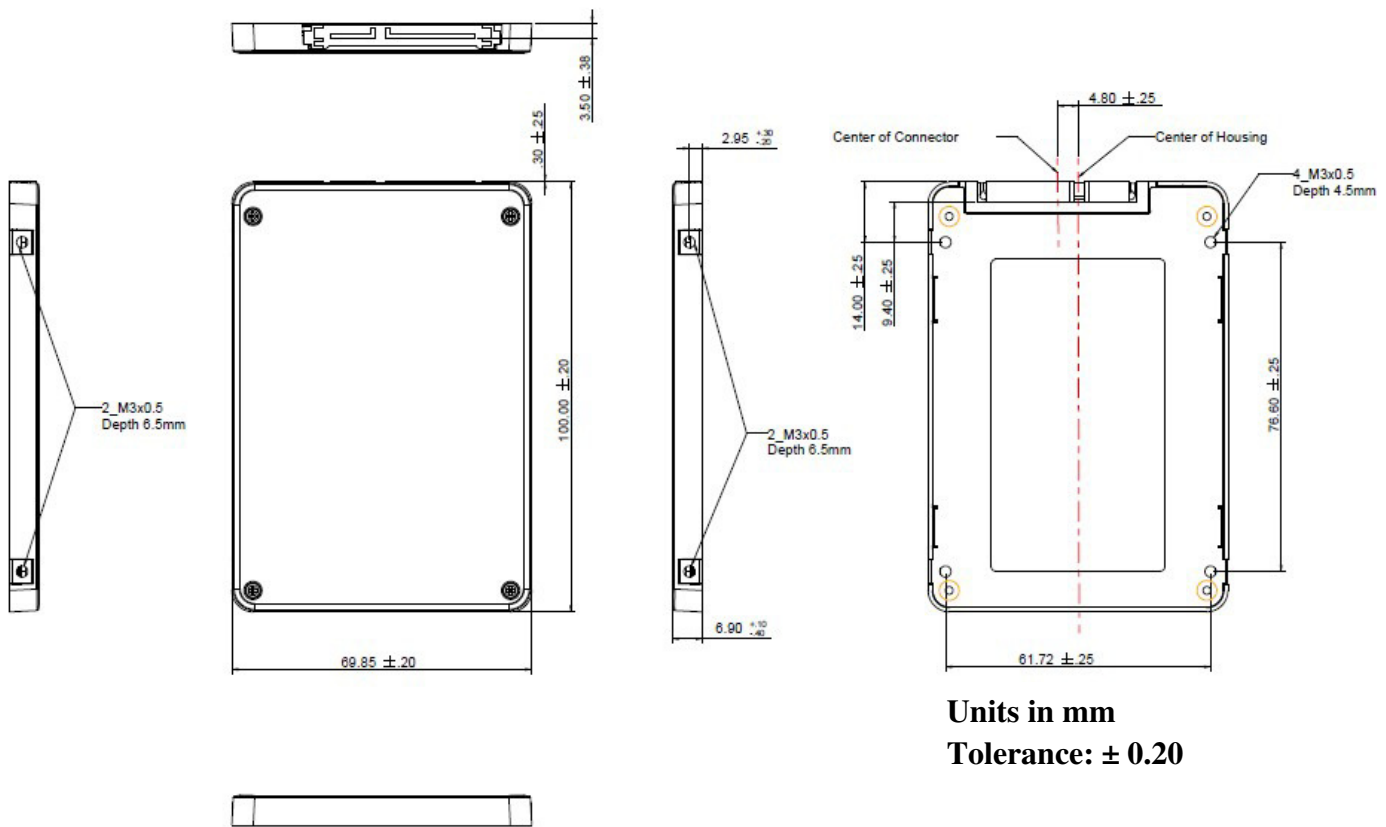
SFD25N-M with 7mm Housing physical dimensions
